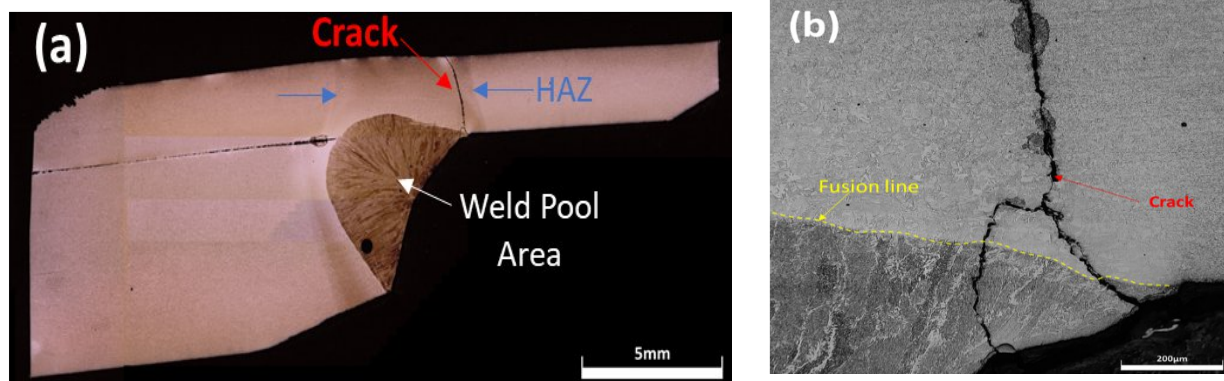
(a) the transverse section of cracked region at the weld joint of rim and disc (b) Optical microscopic image of crack tip
